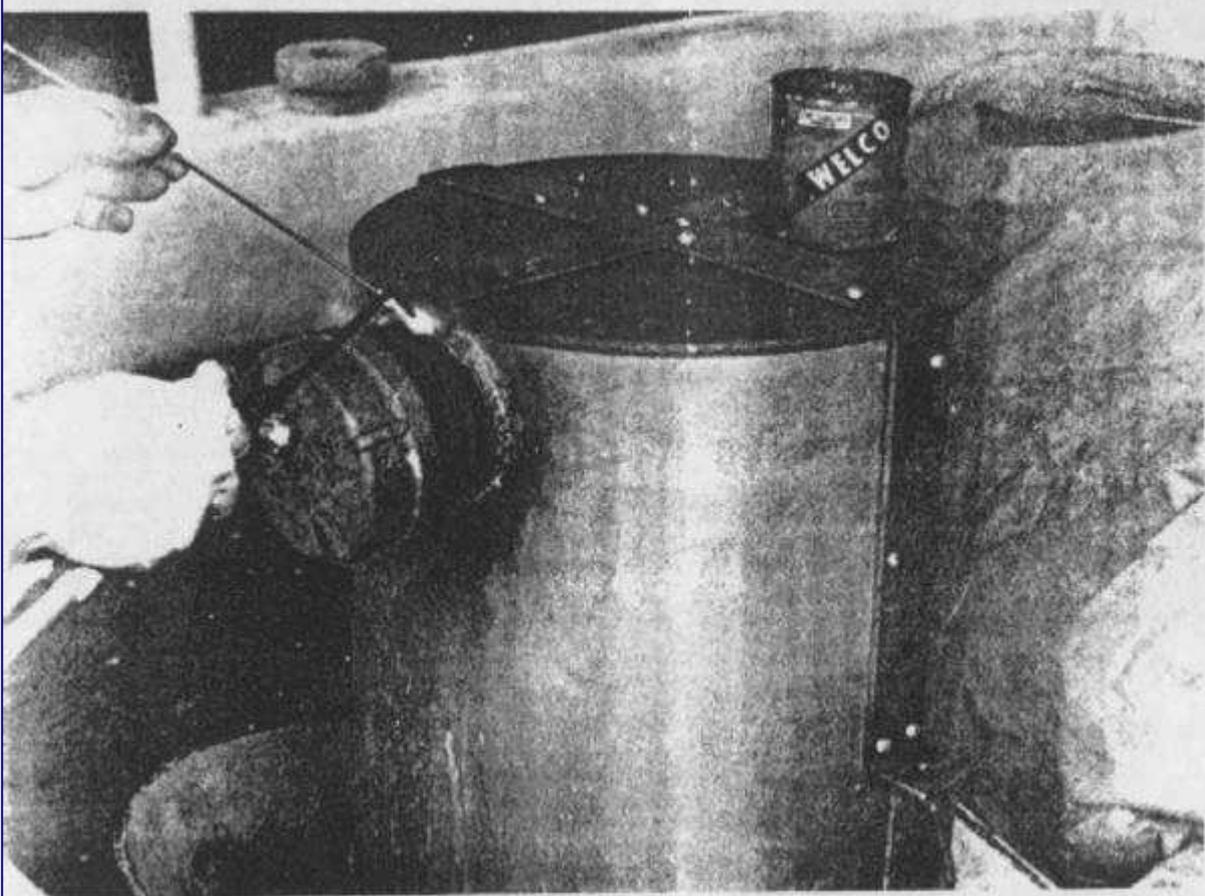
The support frame can be brazed or bolted to the side of the gasifier unit. All bolts should be sealed air tight.
